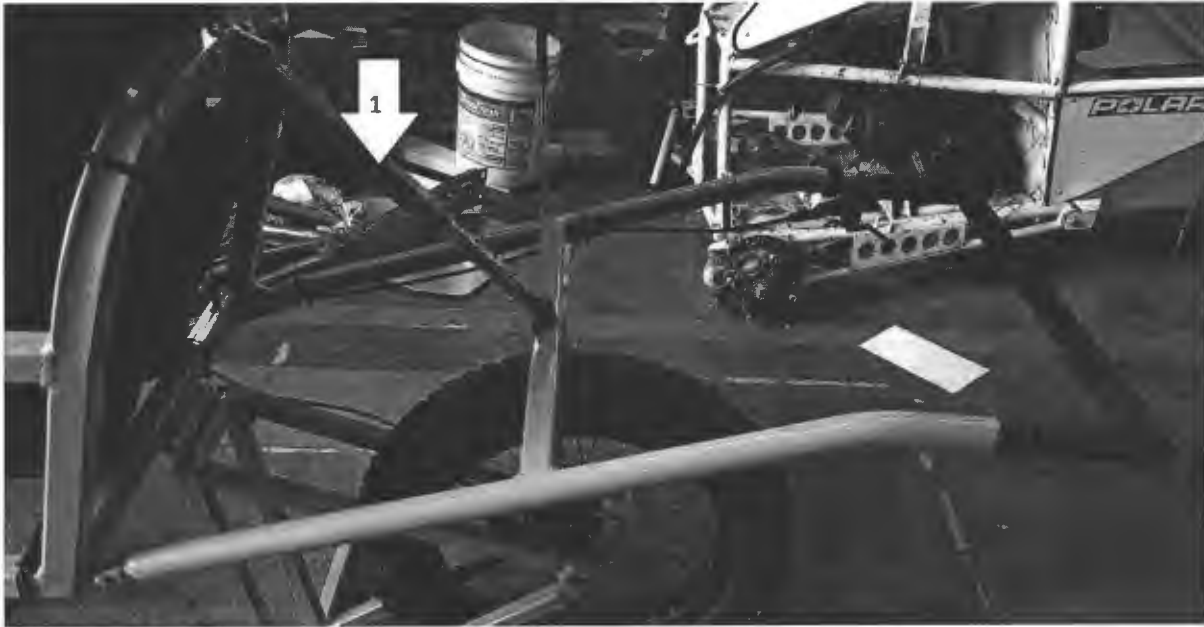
The adjustable rear handles. 1) Two-piece assembly with quick release pin that allows the rear handles to be adjusted.
